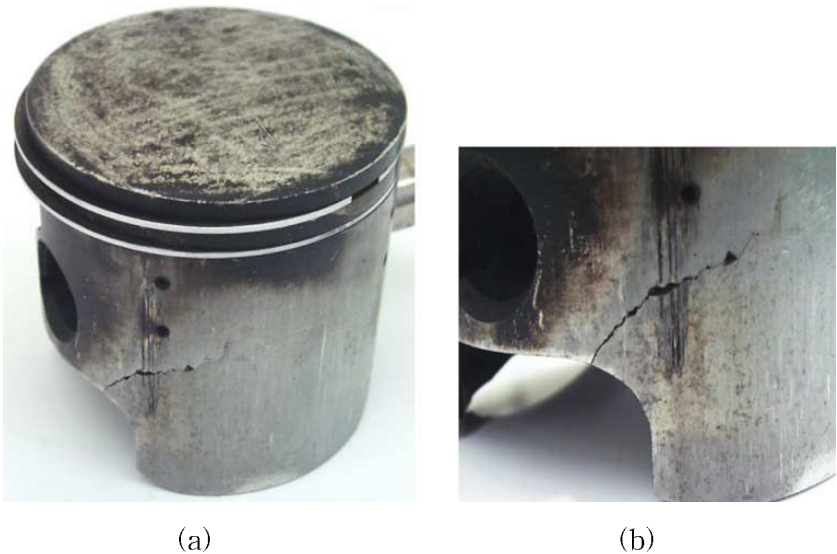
Engine piston with damaged skirt: (a) piston; (b) detail of damaged skirt
